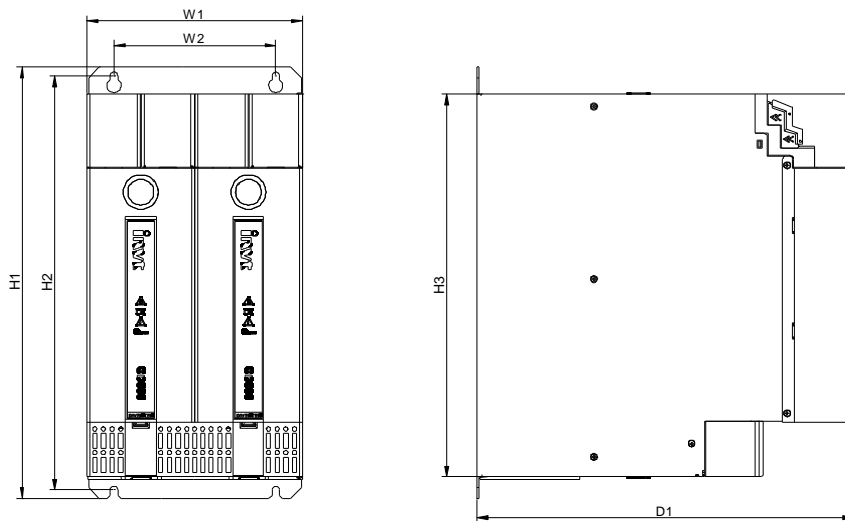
Wall-mounting drawing for the 380V 45–75kW inverter units
